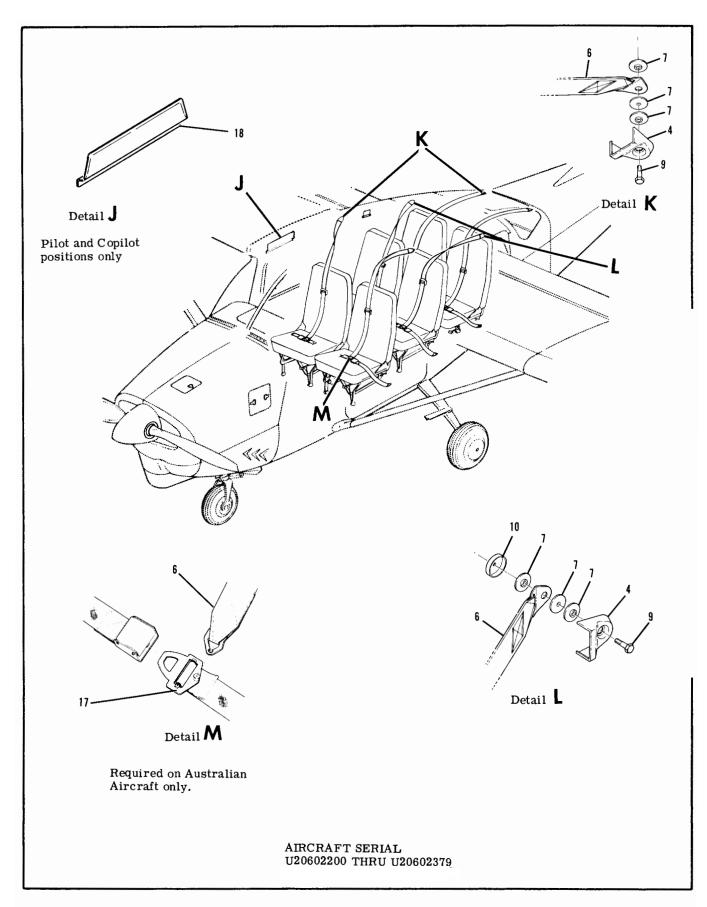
Seat Belt and Shoulder Harness Installation (Sheet 2 of 3)
